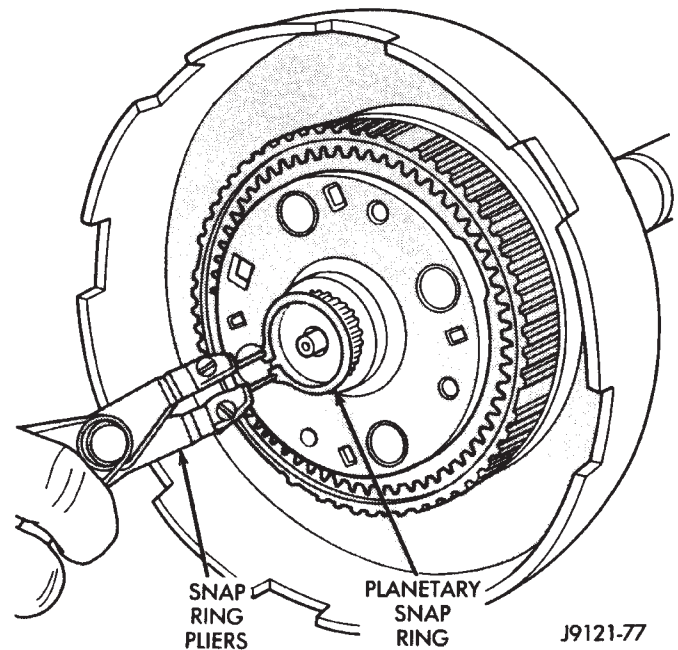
Installing Front Planetary And Annulus Gear Assembly (46RH)
